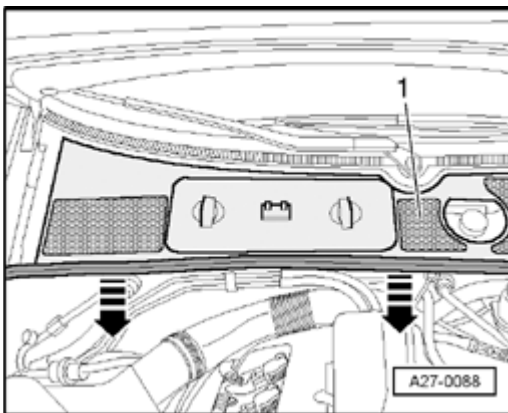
Identifying Plenum Chamber Cover & Rubber Seal
